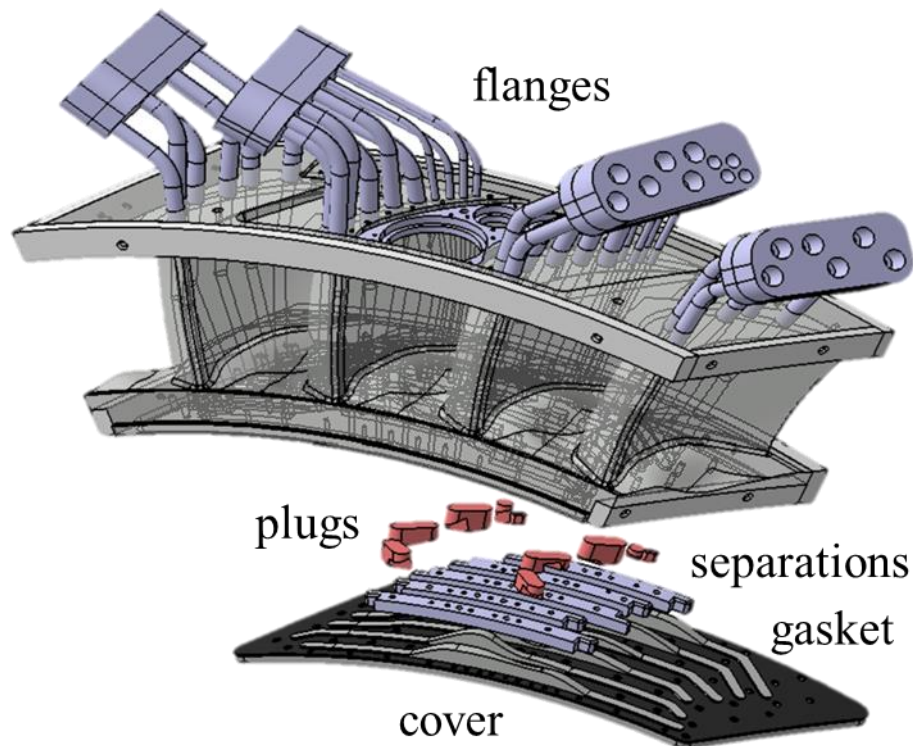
exploded view of the 3D stator 2 heat transfer platform CAD model. 58 components, excluding instrumentation, compose the assembly.
